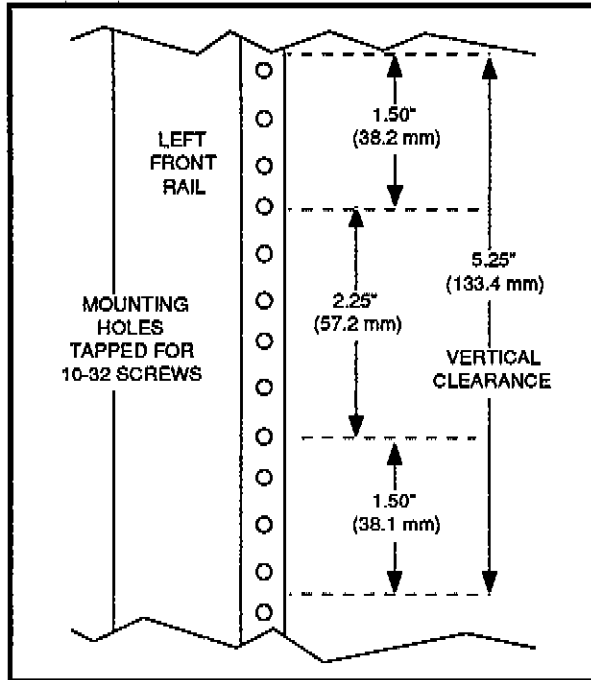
Locating mounting holes on front rails of equipment rack.
